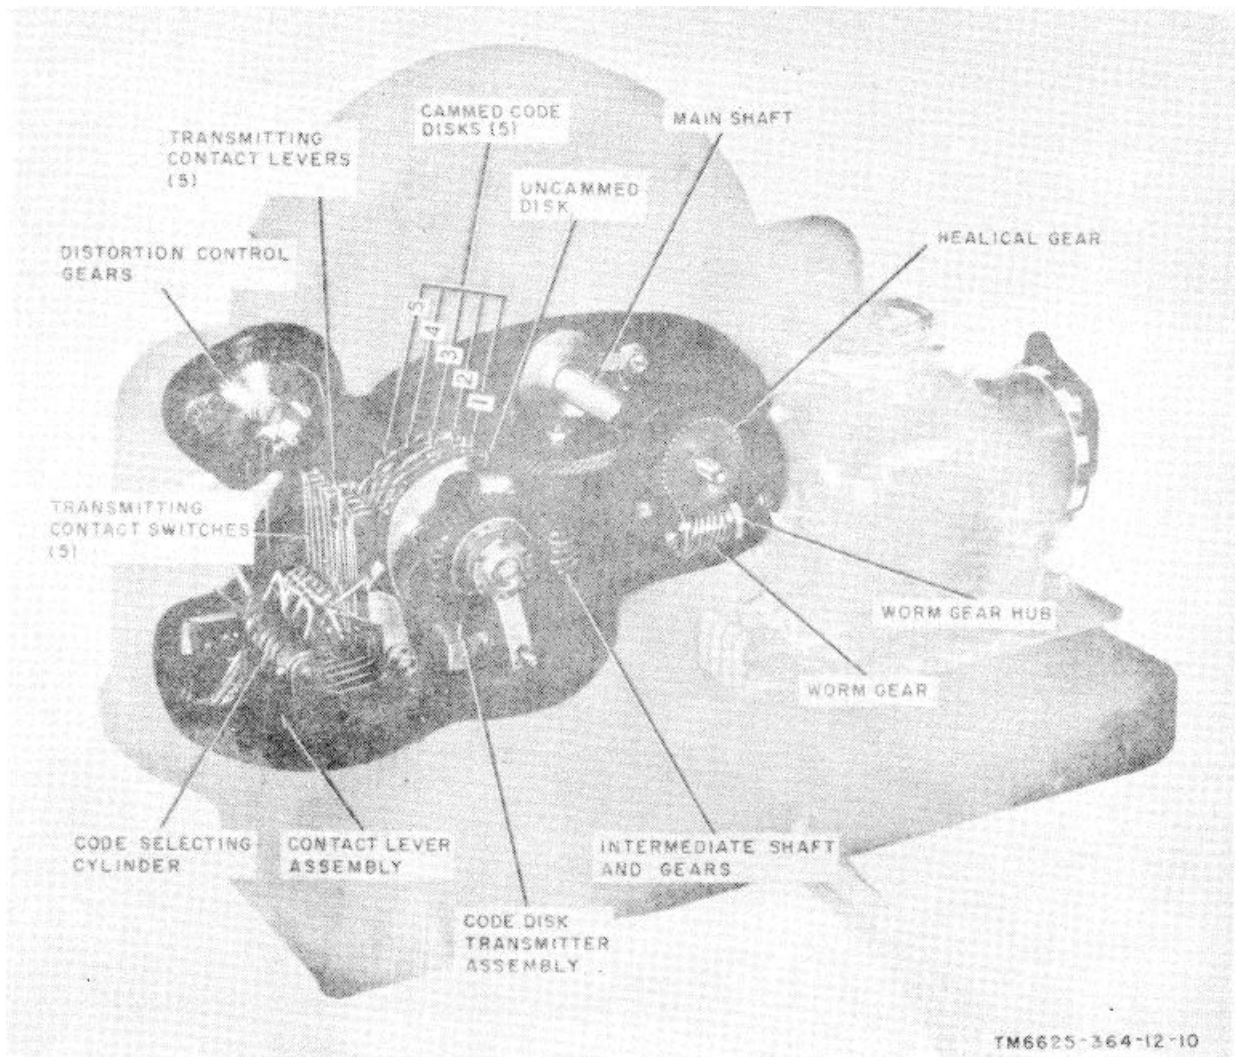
Test set, cover removed showing gears, code disks, and other parts.
